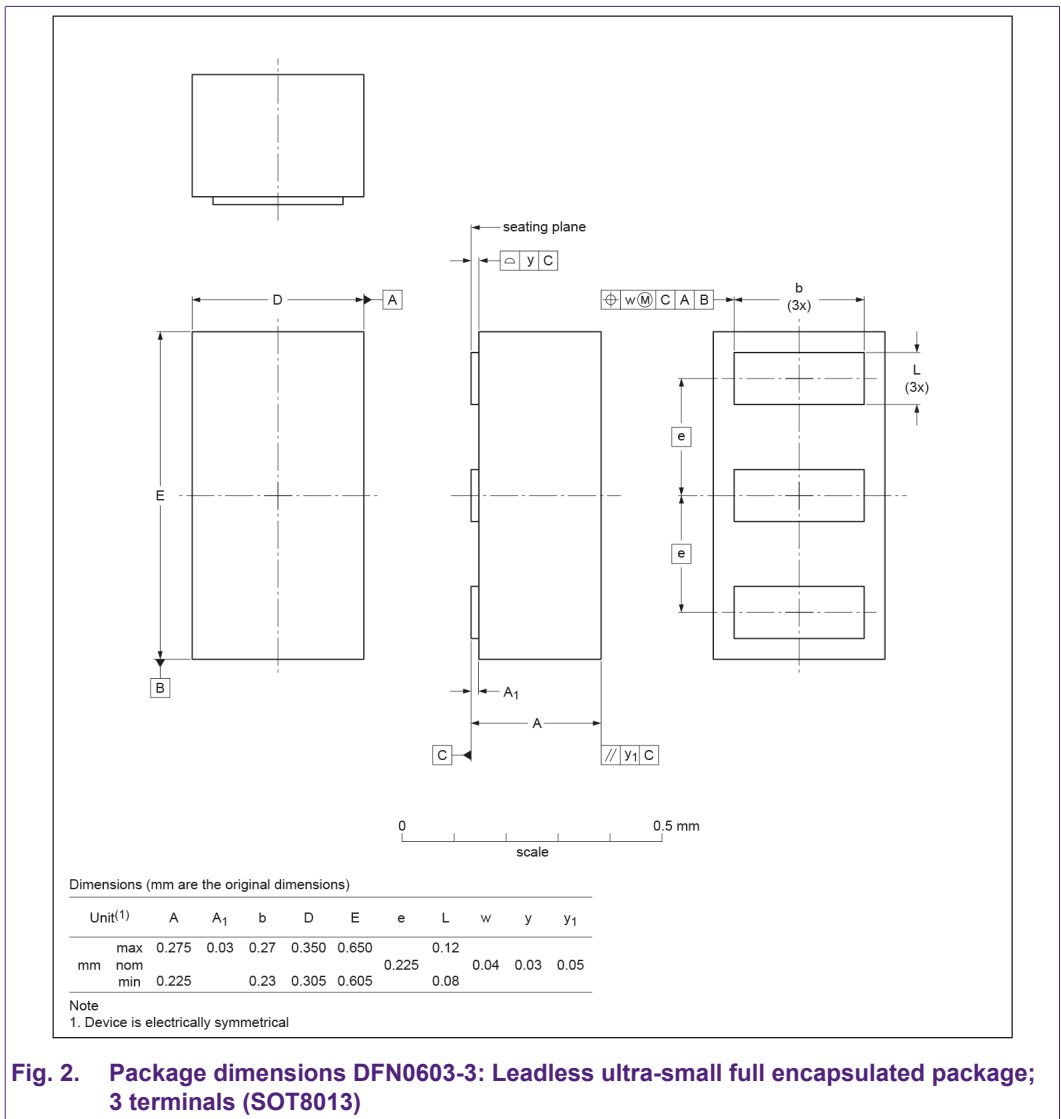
Package dimensions DFN0603-3: Leadless ultra-small full encapsulated package; 3 terminals (SOT8013)
